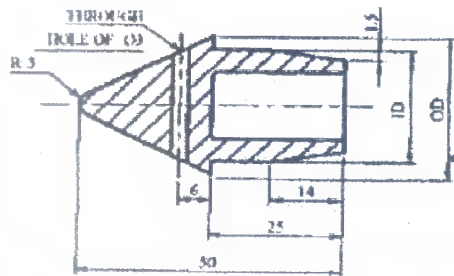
TYPICAL DRAWING OF CAP FOR TUBE END
